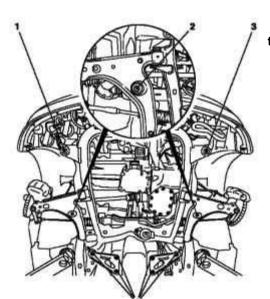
Removing the body of the front axle: 1, 2,3,4 - bolts fixing
